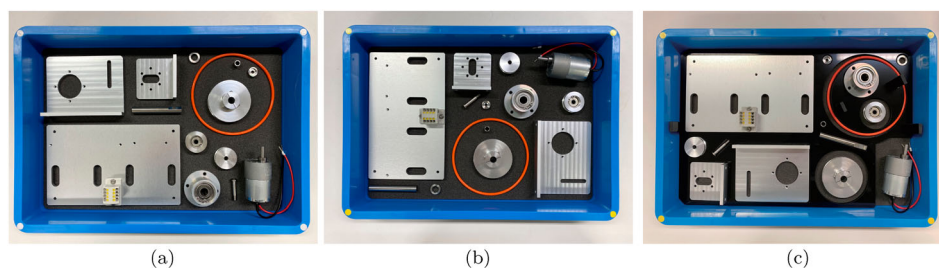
Examples of parts placement on the parts tray for the assembly task. (a) Pattern A; (b) Pattern B; (c) Pattern C with template.
